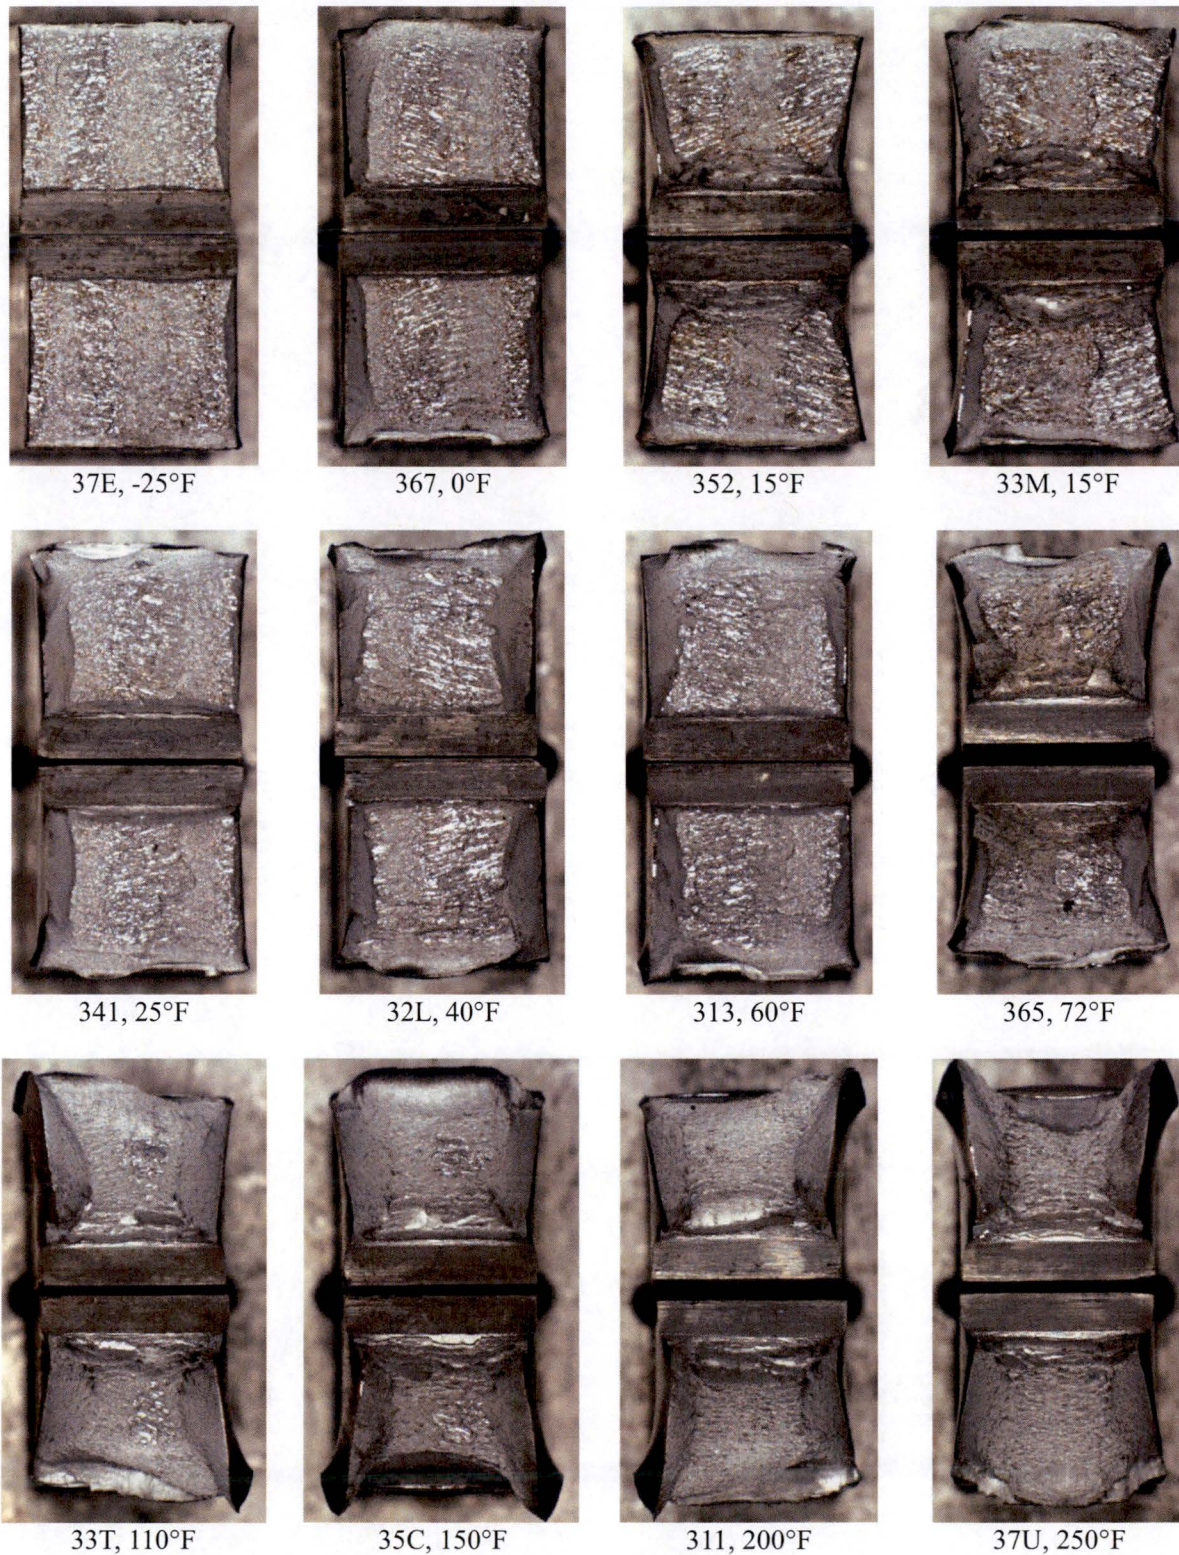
Charpy Impact Specimen Fracture Surfaces for the ANO-2 Reactor Vessel Surveillance Program Weld Material (Heat # 83650)
